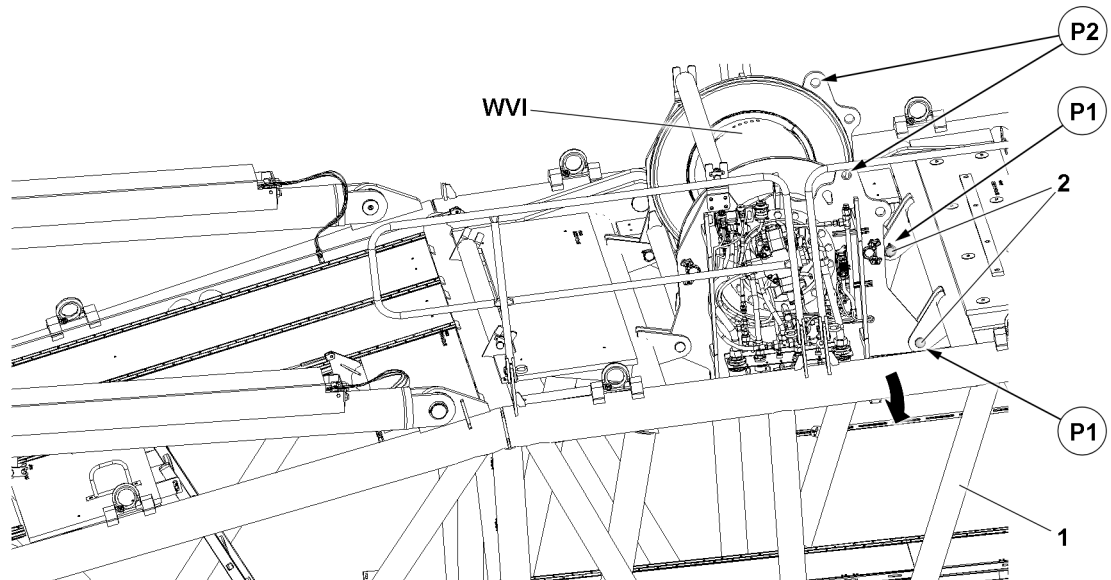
Fastening winch 6 WVI to the auxiliary crane and unpinning
